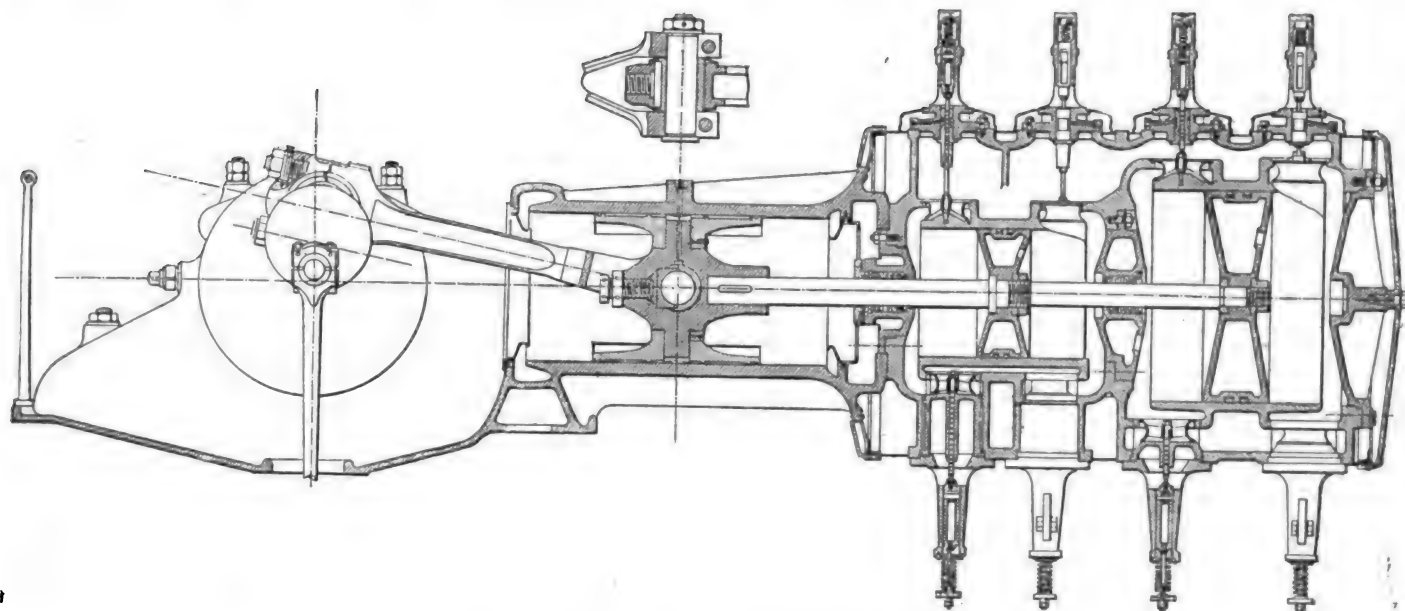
LENTZ TANDEM COMPOUND STEAM ENGINE.
